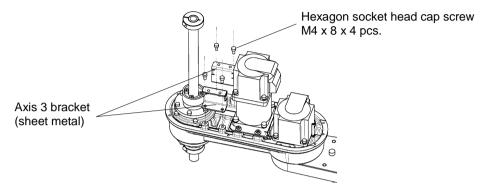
Dismounting axis 3 bracket (sheet metal) (KHL-300, KHL-400)
